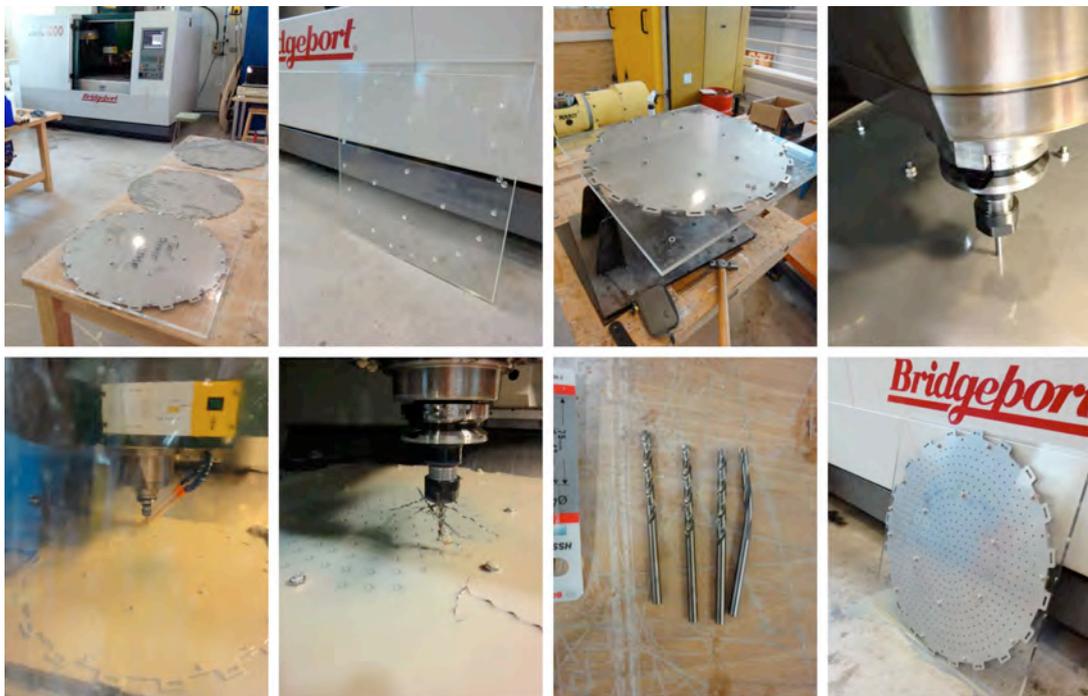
The pin hole drilling process using Falmouth University's in-house CNC milling machine, photos: T. Jørgensen, 2012.
